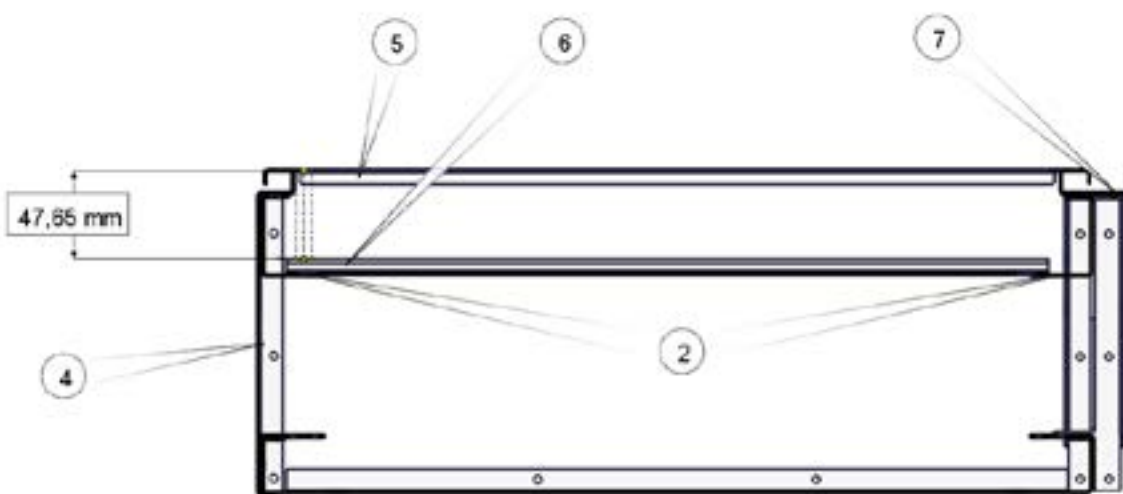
Installing covers to frame structure. The cover can be fastened using screws or screws and hinges. The cover can also be sealed.
